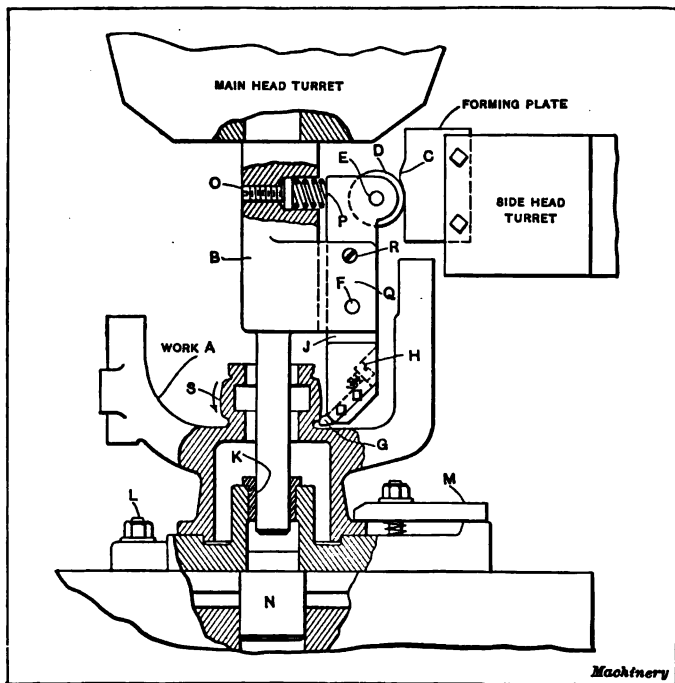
Attachment for Convex Turning in Vertical Turret Lathe
